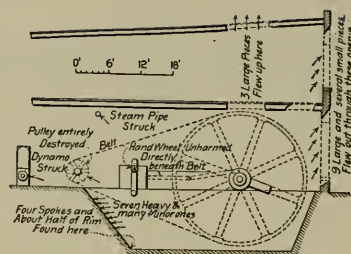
SKETCH SHOWING PATH OF PIECES.
